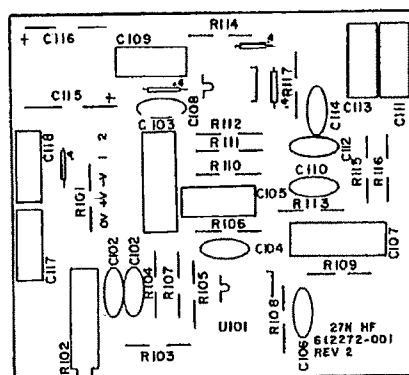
Typical Circuit Board Layout - Harmonic Filter Module
